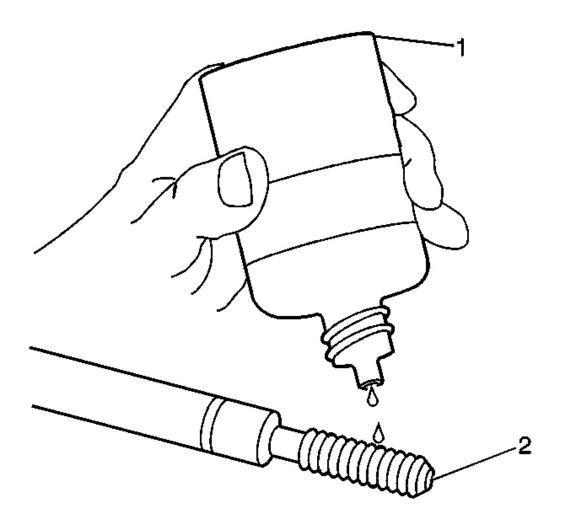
Lubricating Installer Tool Using Driver Oil Courtesy of GENERAL MOTORS CORP.
